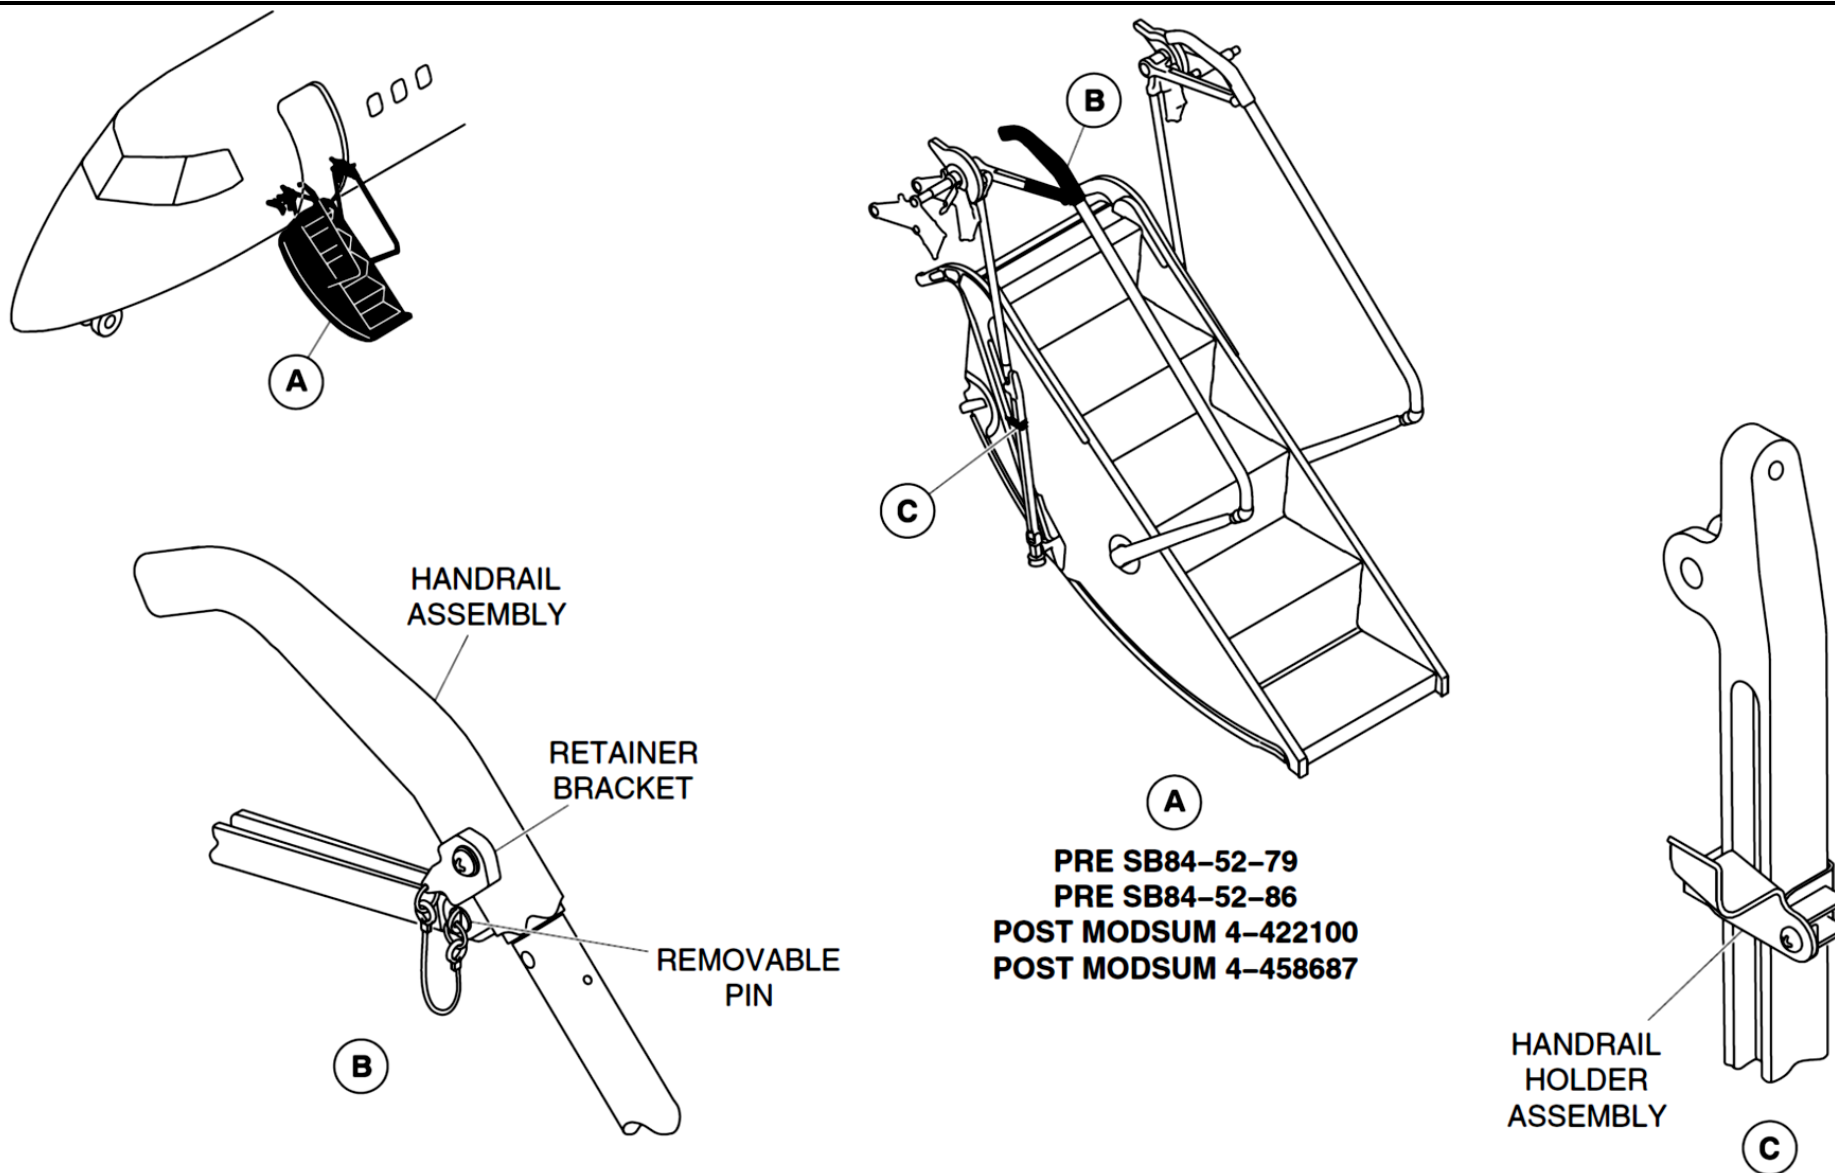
Airstair Door with Jetway – Folding Handrail Detailed 1 of 2
